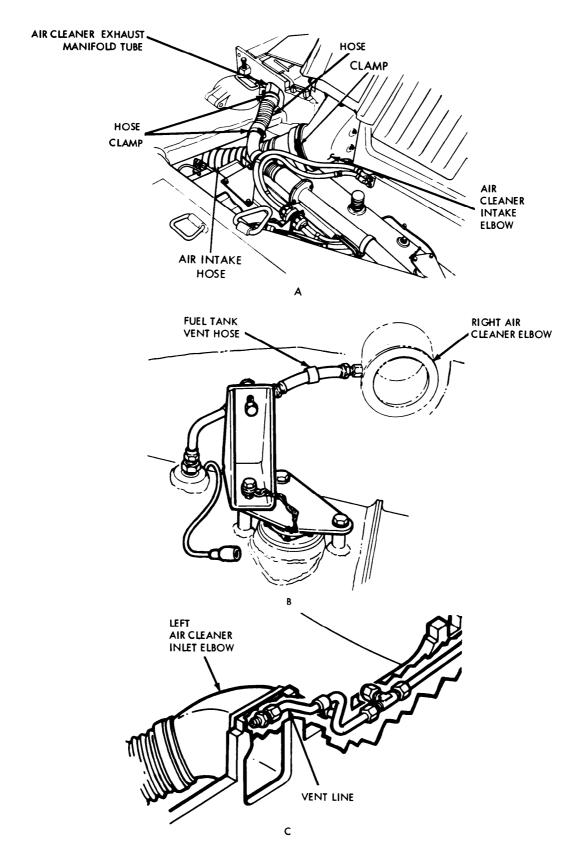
Air cleaner replacement (sheet 1 of 2).
